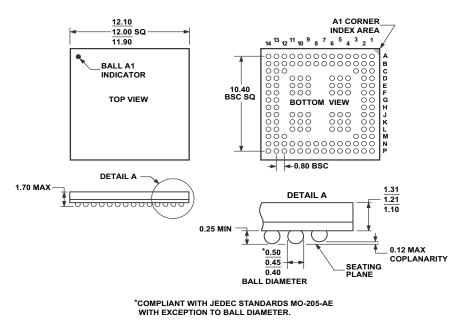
136-Ball Chip Scale Package Ball Grid Array [CSP\_BGA] (BC-136-1) Dimensions shown in millimeters
